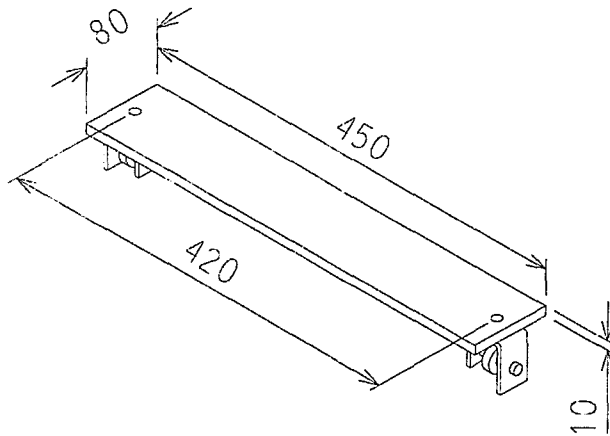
Support plate for the shock tube (dimensions in mm)
